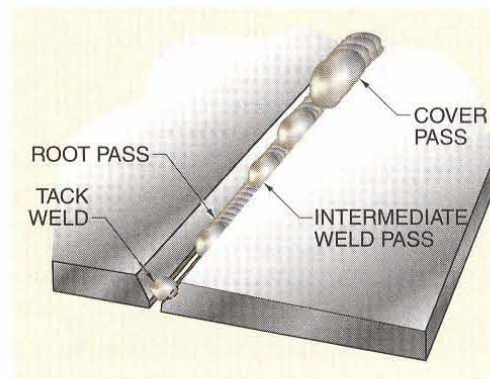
Weld passes used for multiple-pass welding are the root pass, intermediate weld pass(es), and the cover pass.
